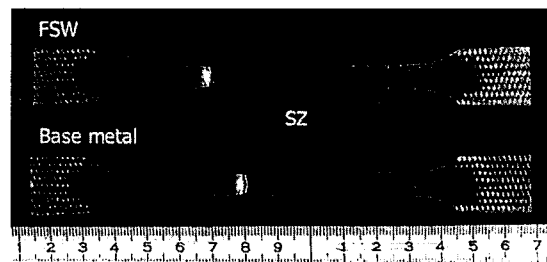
Fractured transverse tensile specimen of the friction stir welded 304 austenitic stainless steel and the base metal
